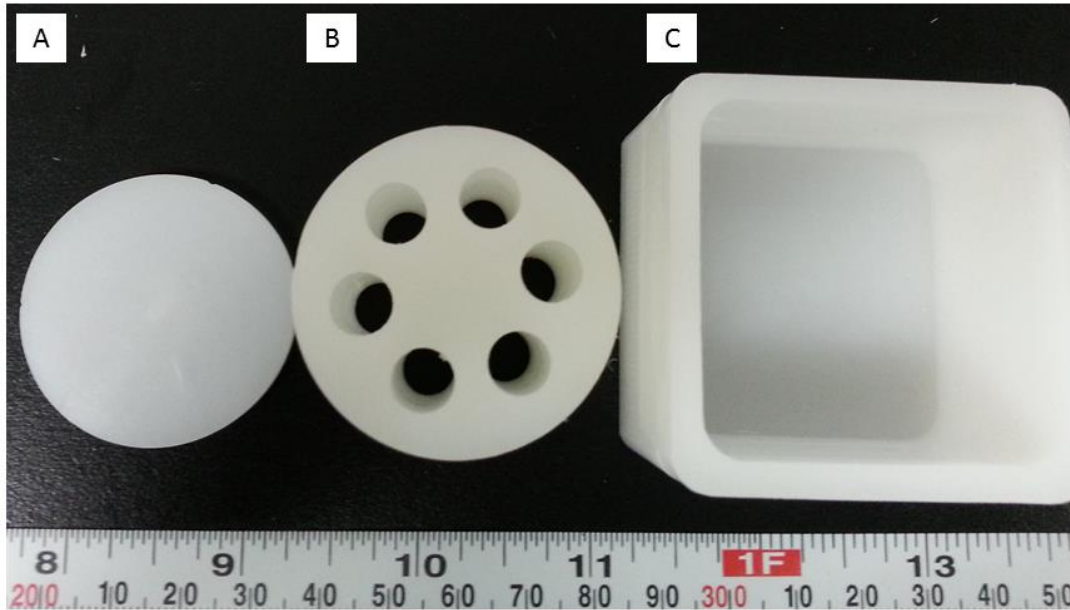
Machinable wax molds for screw and plate blanks. (A) Thin wafer that acts as a base for the screw blank mold; 1.0 in (2.54 cm) diameter and 0.10 in (0.25 cm) thickness (B) Screw blank mold; 1.3 in (3.30 cm) height with 6 through holes of 0.30 in (0.76 cm) diameter. (C) Plate blank mold; 1.75 x 1.75 x 1.3 in<sup>3</sup> (4.45 x 4.45 x 3.30 cm<sup>3</sup>).
